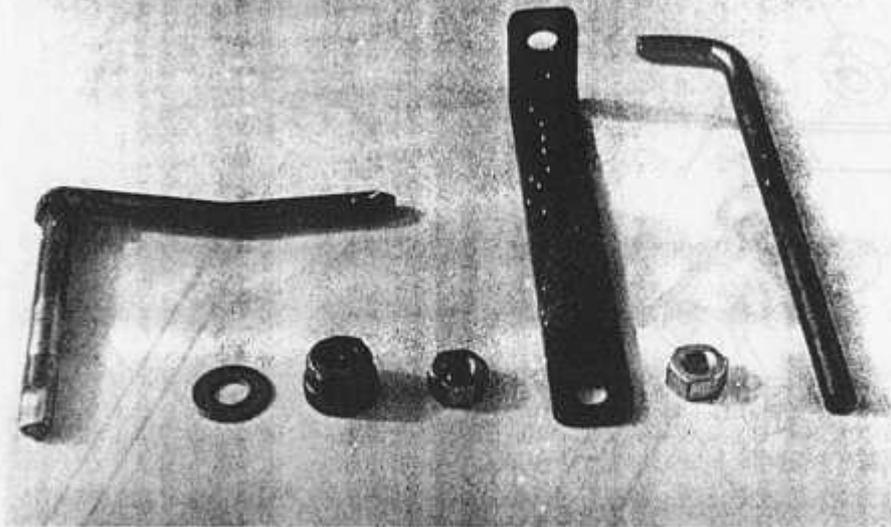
Parts for the shaker assembly. Note the flattened portion of the bolt (at extreme left) which positively locks into the handle (third from right). At the extreme right is a "poker bar" which engages into the hole in the top of the handle to operate the shaker mechanism; the shaker handle will get very hot during normal gasifier operation.
